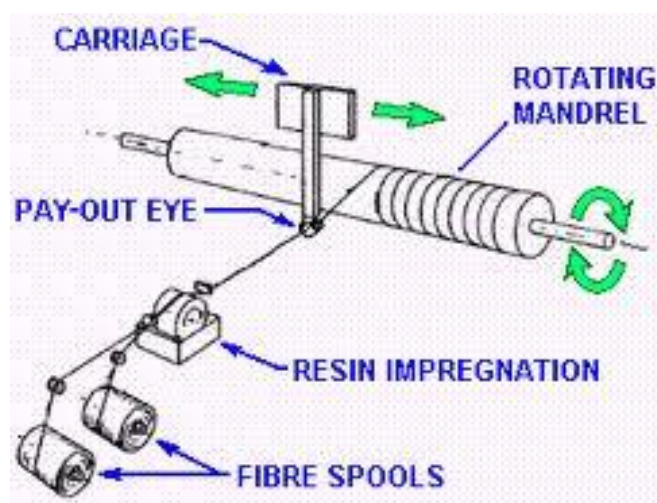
Filament winding (Filament Winding (n.d.), 2012)
